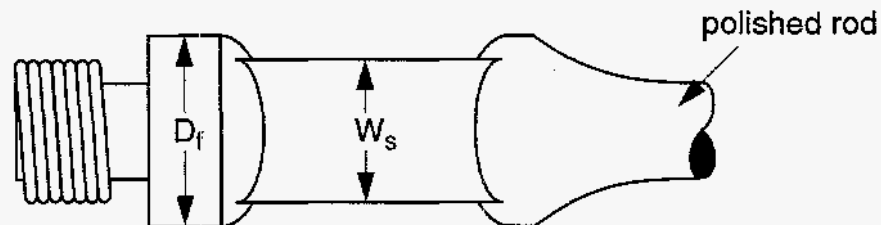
Threaded pin and shoulder at each end of the sucker rod.
